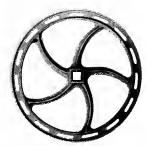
Malleable Iron Brake Wheel; Five Spokes; Diameter, 15 or 16 ins. (Patented.)
